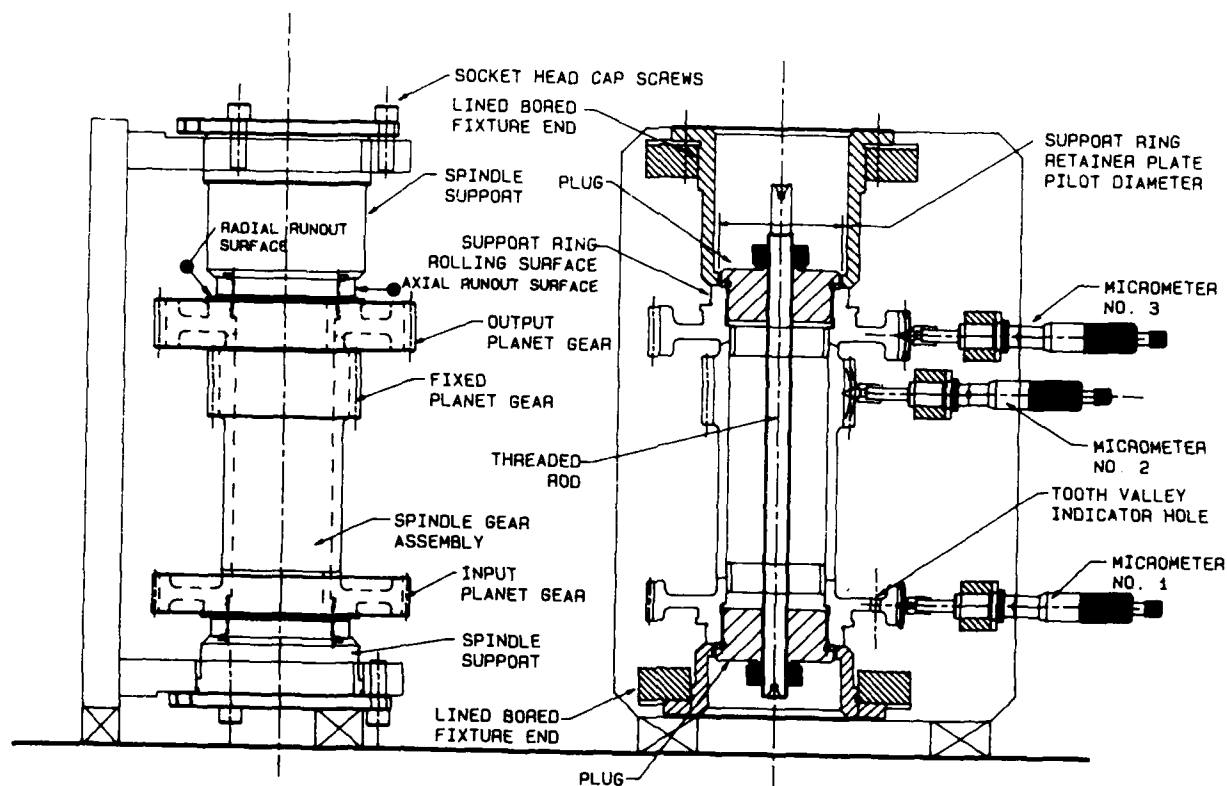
SPINDLE GEAR ASSEMBLY ALIGNMENT & INSPECTION FIXTURE
